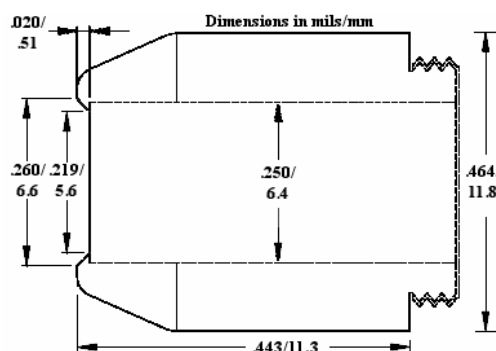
Brass cover dimensions (in mils/mm). This holds the safety plug or collimators and filters.
